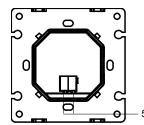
Dimensions - Side View Figure 4. Components - Back View 图 3. 尺寸图 - 侧面 图 4. 部件 - 背面图
